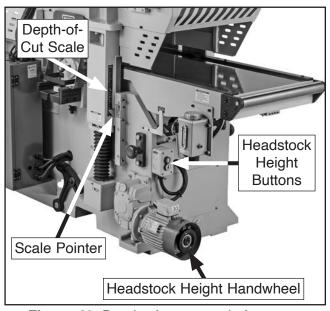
Depth-of-cut controls for upper cutterhead at front of machine.
